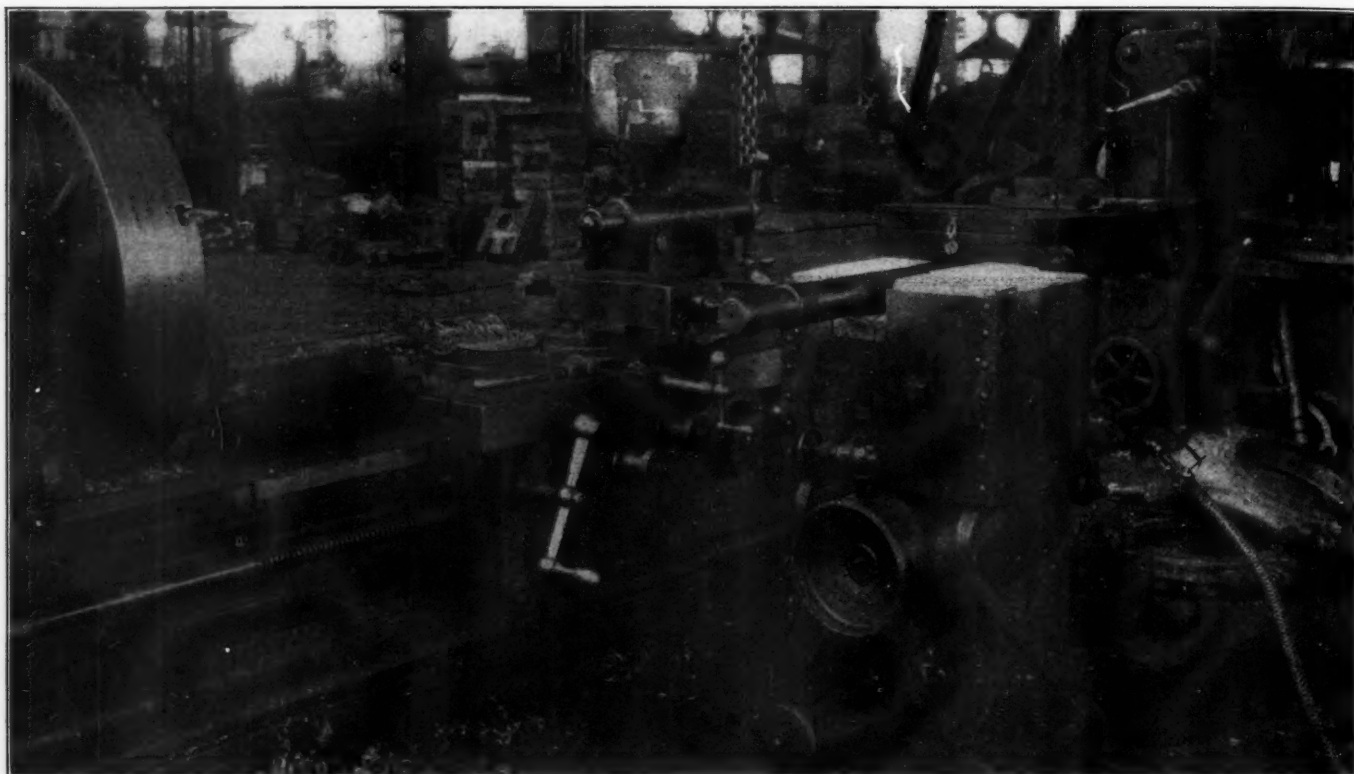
Oil Furnace for Heating Piston Rods Preparatory to Straightening in Lathe Centers.
